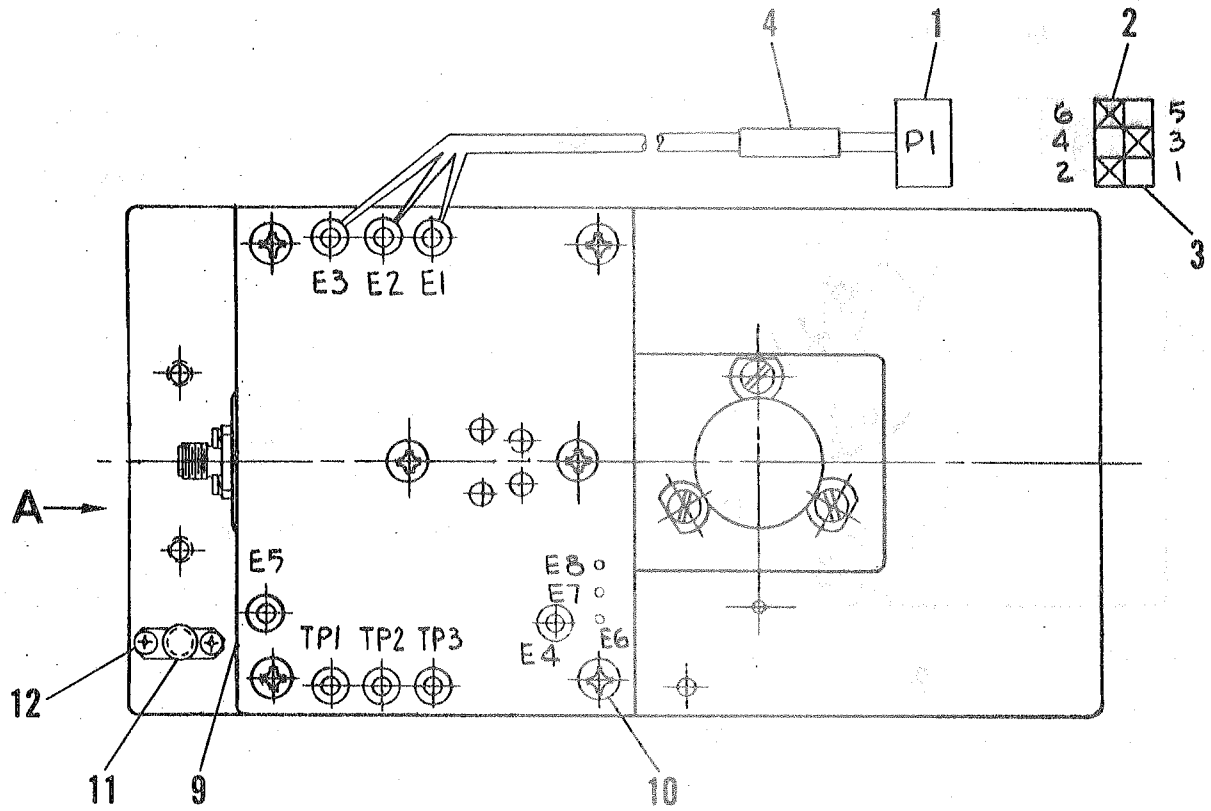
RF Oscillator Assembly (Sheet 1 of 3)
